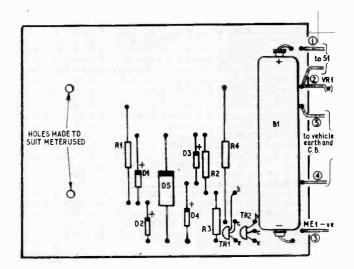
Component layout and Veroboard cut details for the dwell meter
